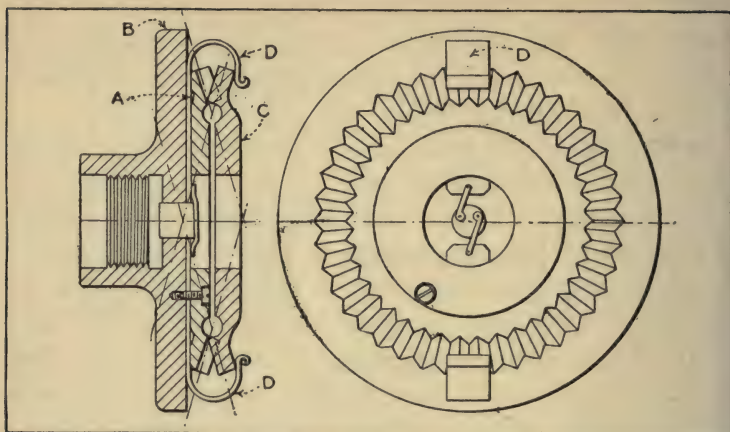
GRINDING FIXTURE FOR THE LARGE BEVEL RING GEAR IN THE REAR AXLE OF AN AUTOMOBILE
